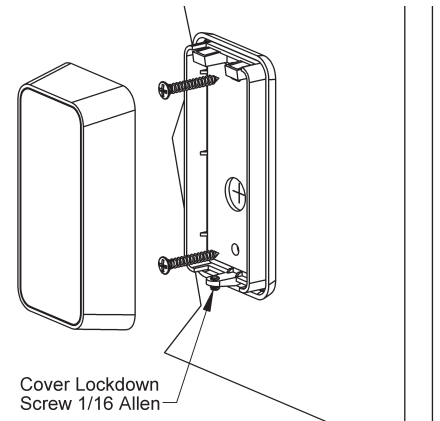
BAPI-Stat “Quantum Slim” Mounting
